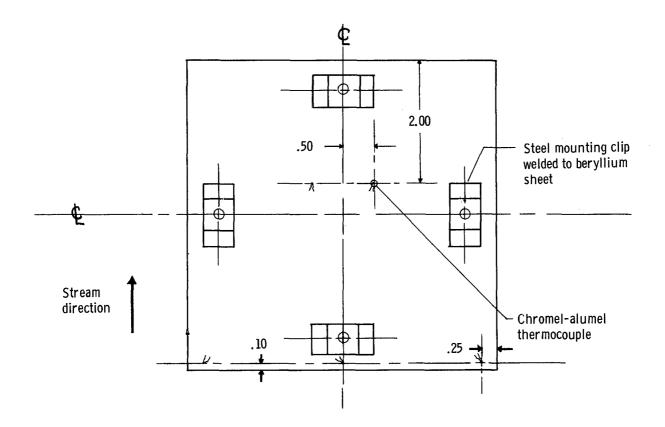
Location of thermocouples and steel attachment clips on arc-jet test specimens. (All dimensions are in inches.)
